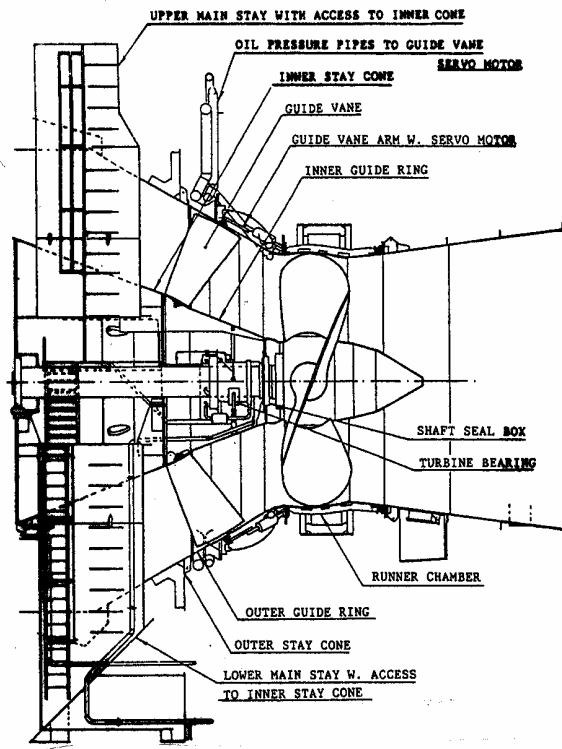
Bulb turbine (Courtesy of Kvaerner Brug)
